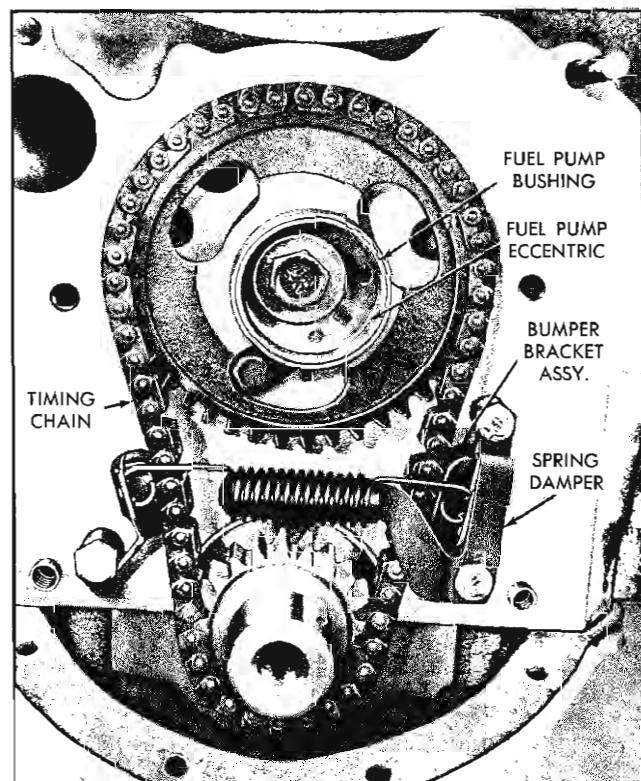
Front of Engine with Timing Cover Removed (4 cyl.)
